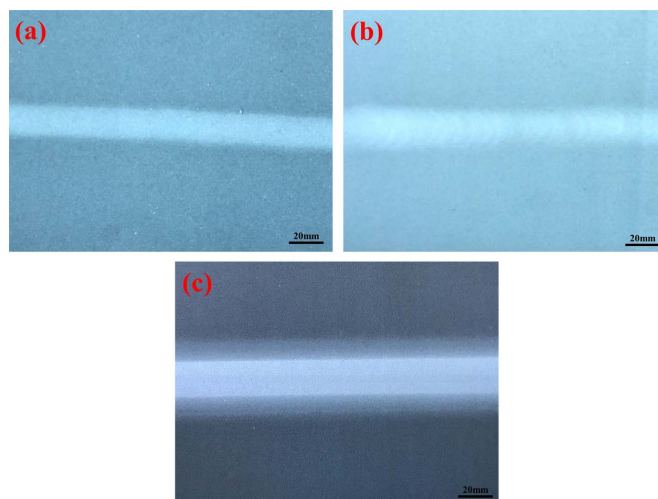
X-ray photos of welded joints: (a) CMT; (b) TIG; (c) FSW
